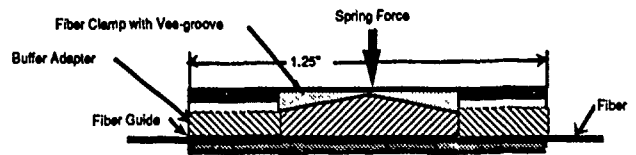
Side view of molded splice showing fibers in place under vee-groove clamp.
